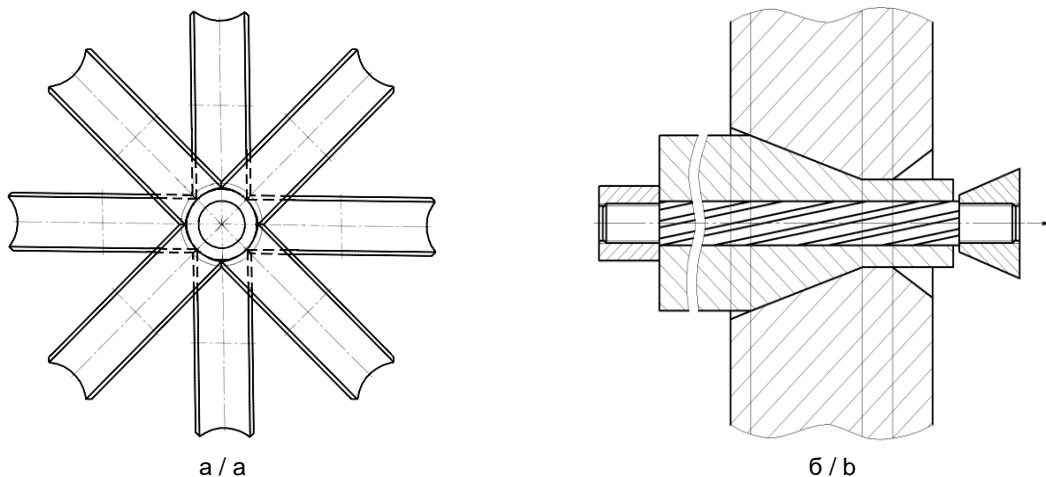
Scheme of the barrel blank crimping: a – between the rollers; b – in the conical mould / *Схема обжатия ствольной заготовки: а - между роликами; б - в конической матрице
